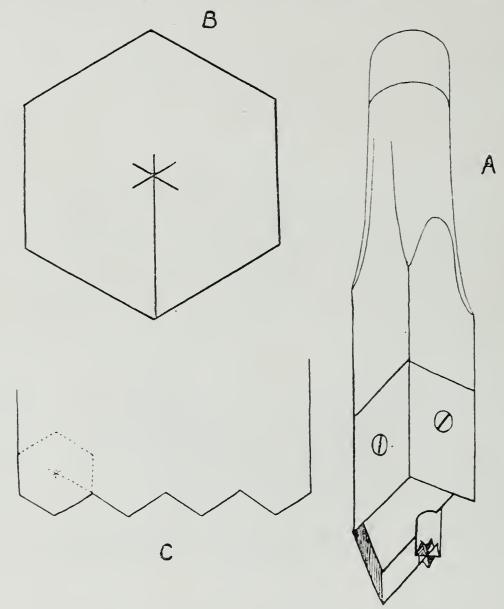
(a), Tool used for cutting tarred felt paper discs, one-third size; (b) disc about one-half size; (c) showing how the tool is used, the dotted line indicates the position of the edge of tool. (After Goff).
